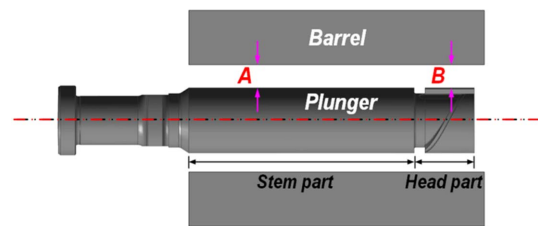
Dimensionless clearance of stem part (A) and head part (B) [Reference 4].
